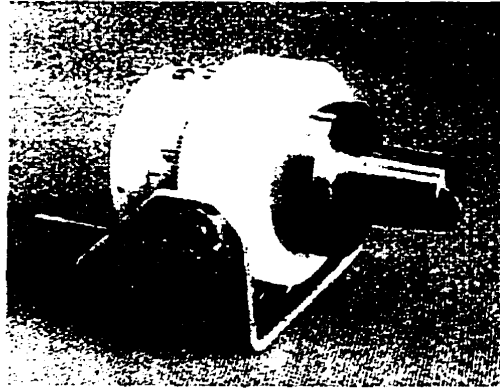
Specimen holder used to level tapers for profilometric measurements.
